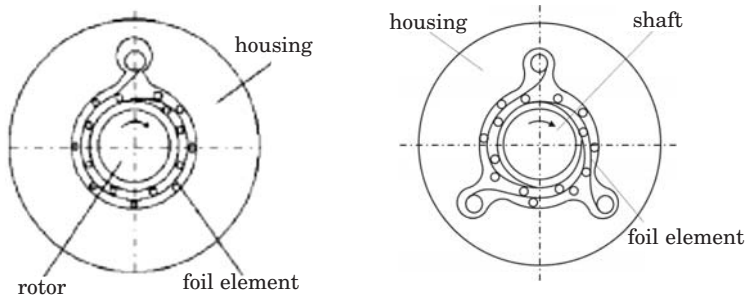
Structural diagram of the tested bearings. On the left – a spiral foil bearing (HOU et al. 2004); on the right – a multileaf bearing
